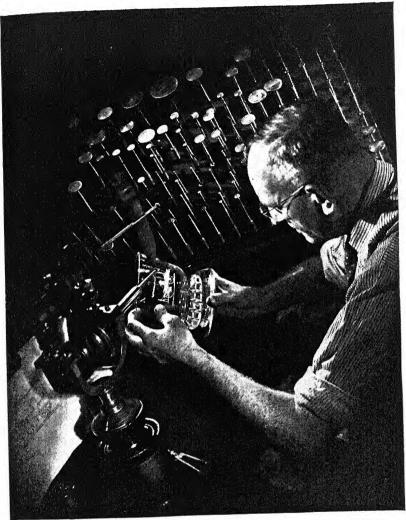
Copper wheel engraving. The bowl is held against a rotating copper wheel which cuts through the glass. This is handwork and requires great skill. (Courtesy of Corning Glass Works.)
